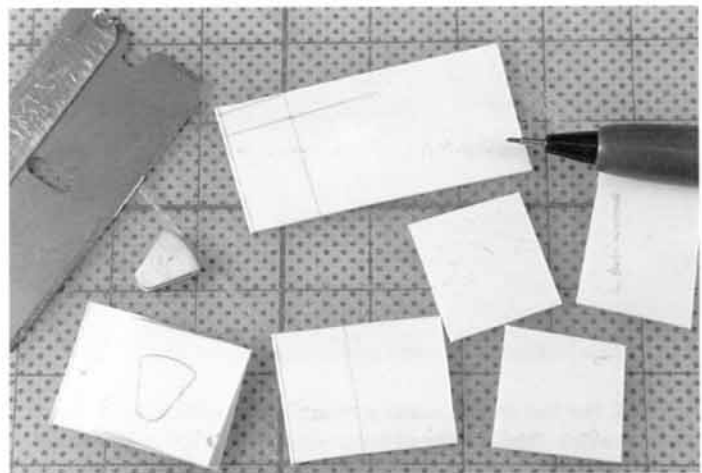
The first step in making a throttle quadrant is to get the correct thickness. Using super glue, fasten layers of sheet plastic together to achieve the thickness that you need.
